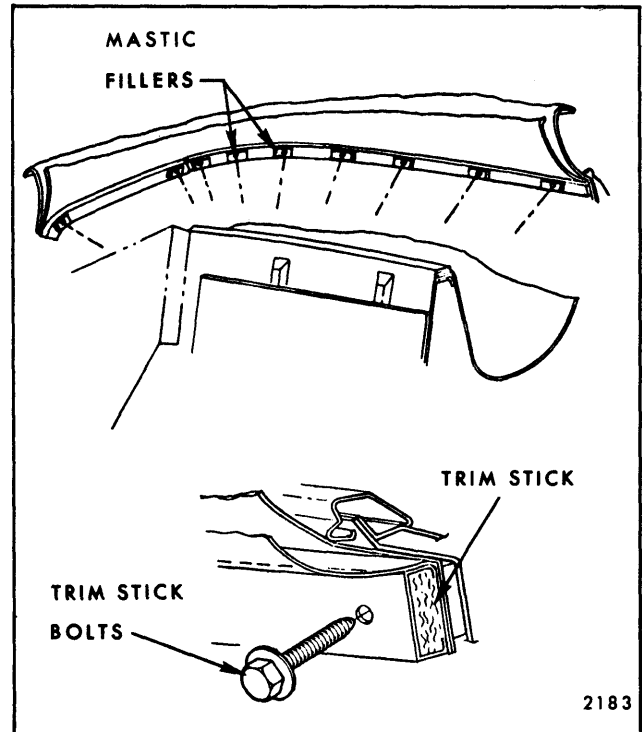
Checking Trim Stick Fillers - "F and Z" Styles
